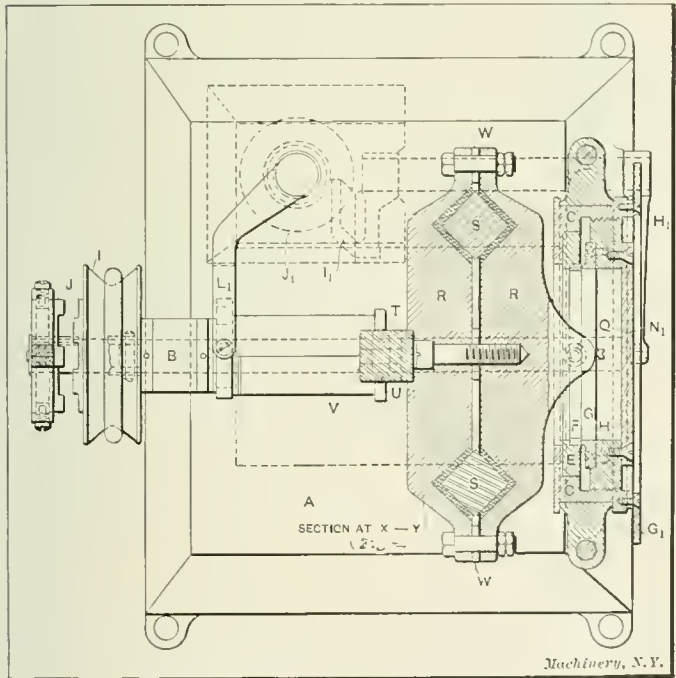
Plan View and Cross-section at X-Y, Fig. 4
